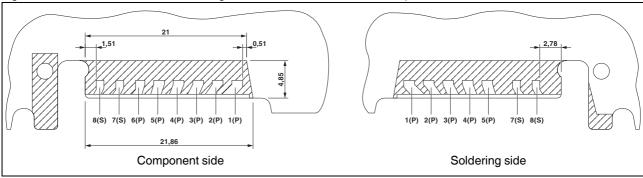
Detailed dimensional drawing of TBUS8-...-PPPPPPSS contact pads
